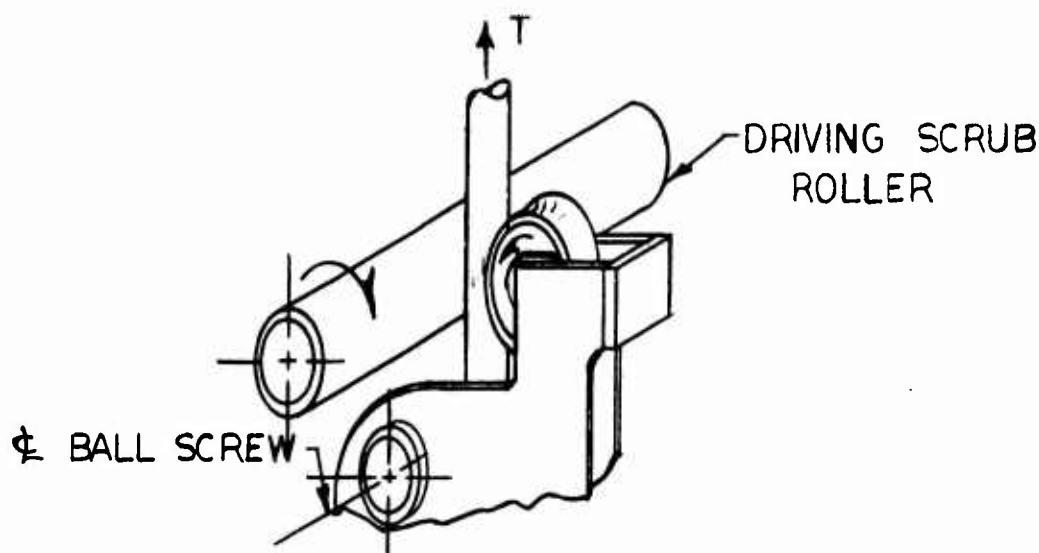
Bellmouth, Scrub Roller, and Ball Screw Assembly, Single-Point Hoist.
